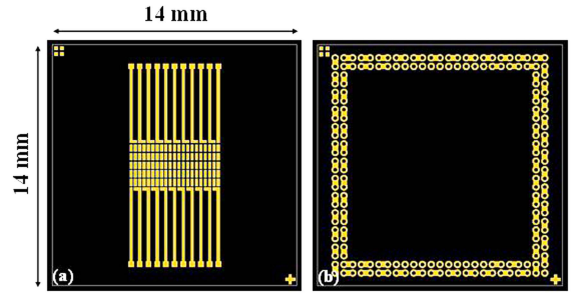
CAD design of (a) top surface and (b) bottom surface of top package for package-on-package process.
